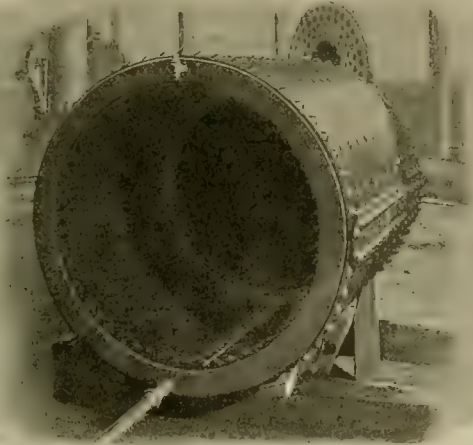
SHOWING THE FURNACE END OF THE BOILER.
